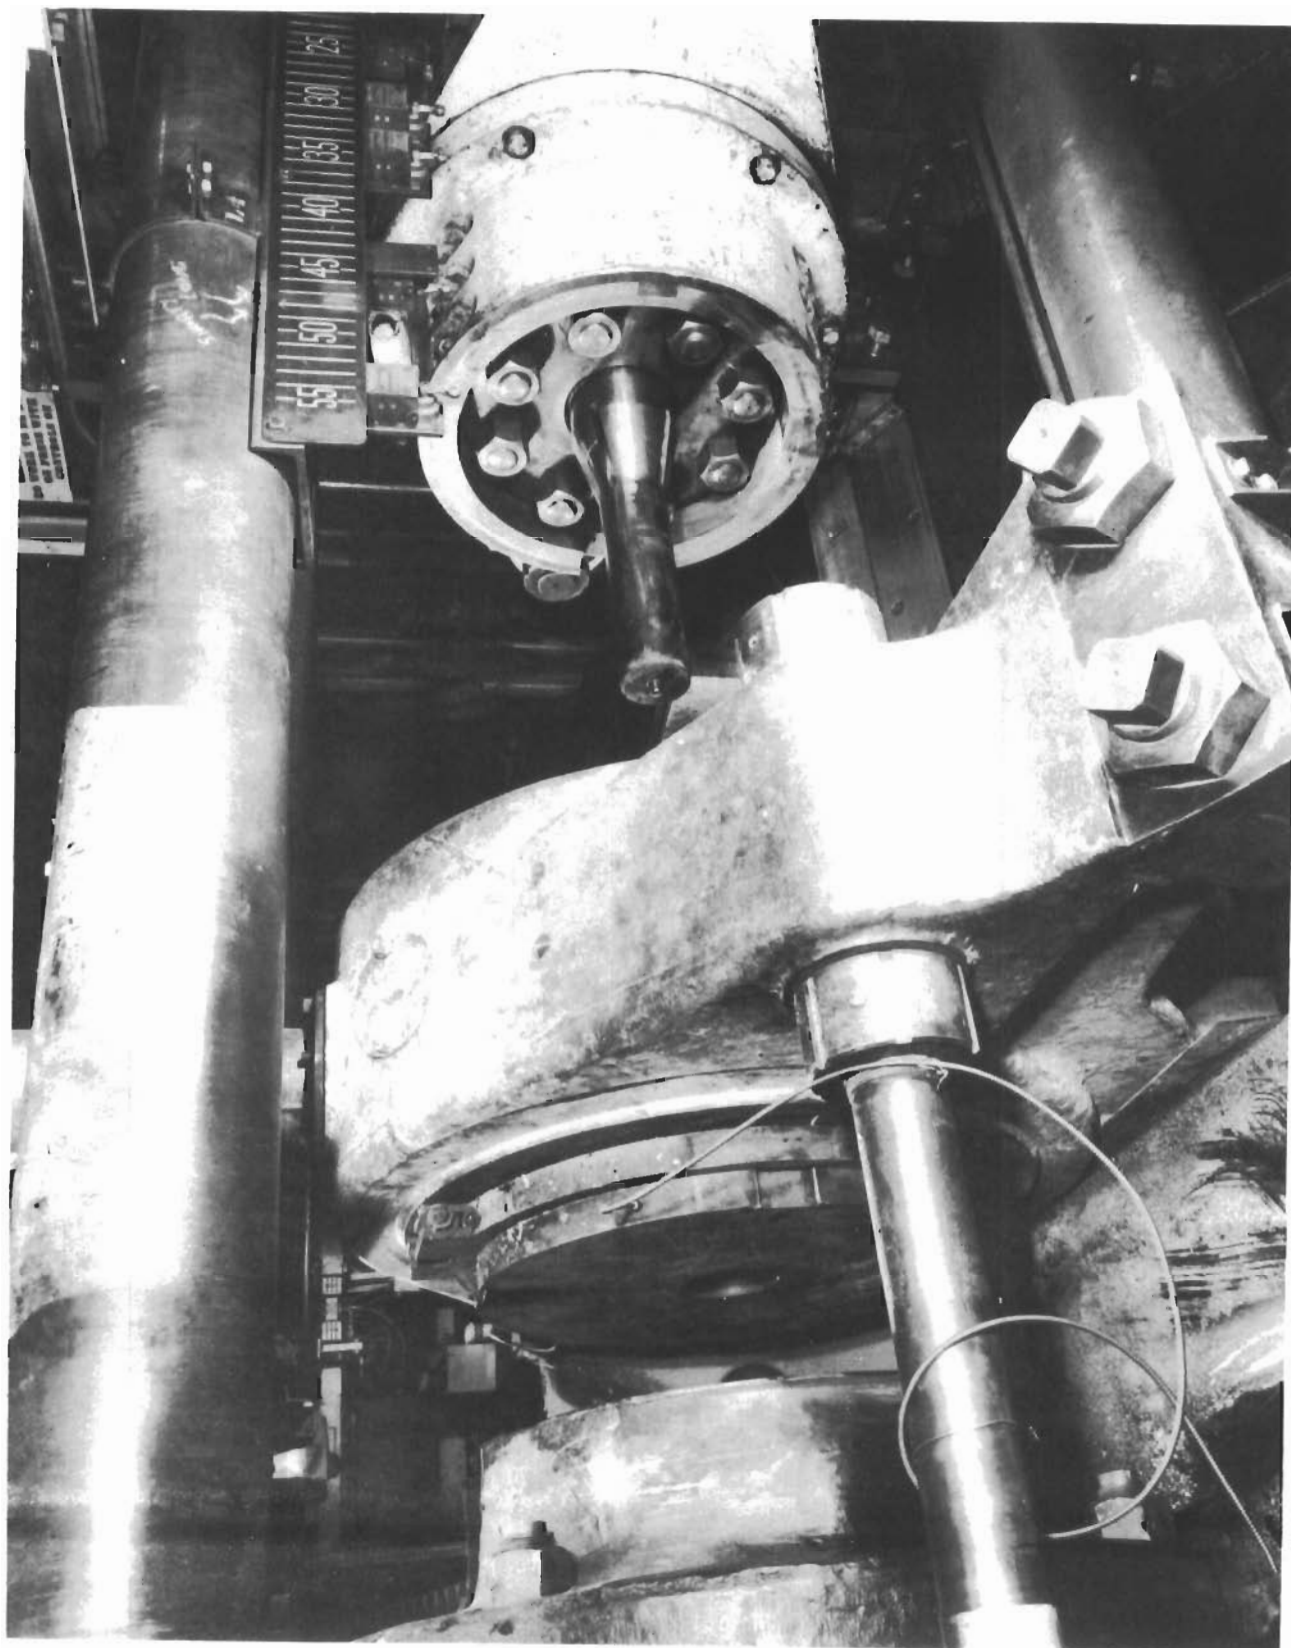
THE BERYLLIUM CORP. STEM AND CONTAINER ASSEMBLY OF THE 1700 TON OIL HYDRAULIC PRESS.
